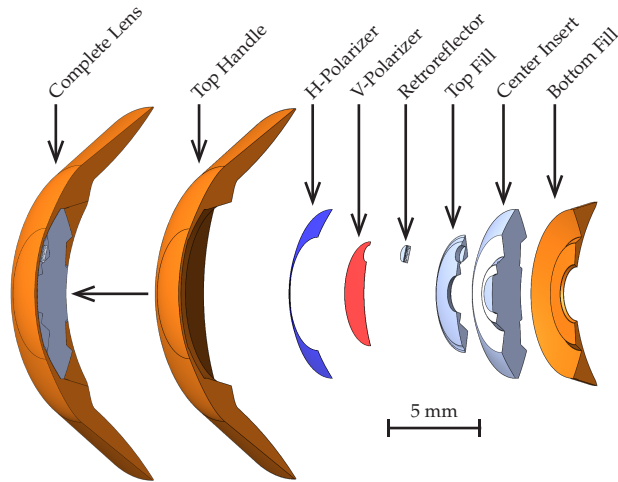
CAD model of a cross-sectioned assembled lens (left) and exploded view (right) showing the various elements of the design.
